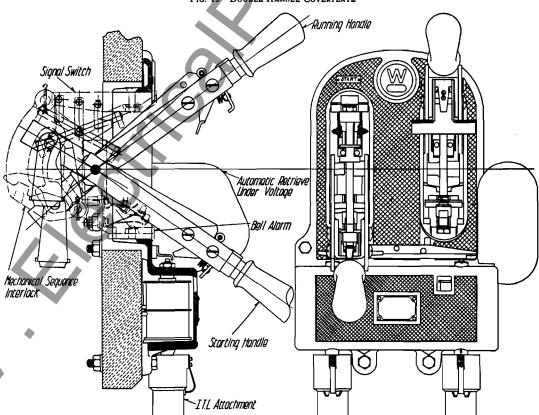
Double Handle Coverplate for Motor-Starting Equipment 11
